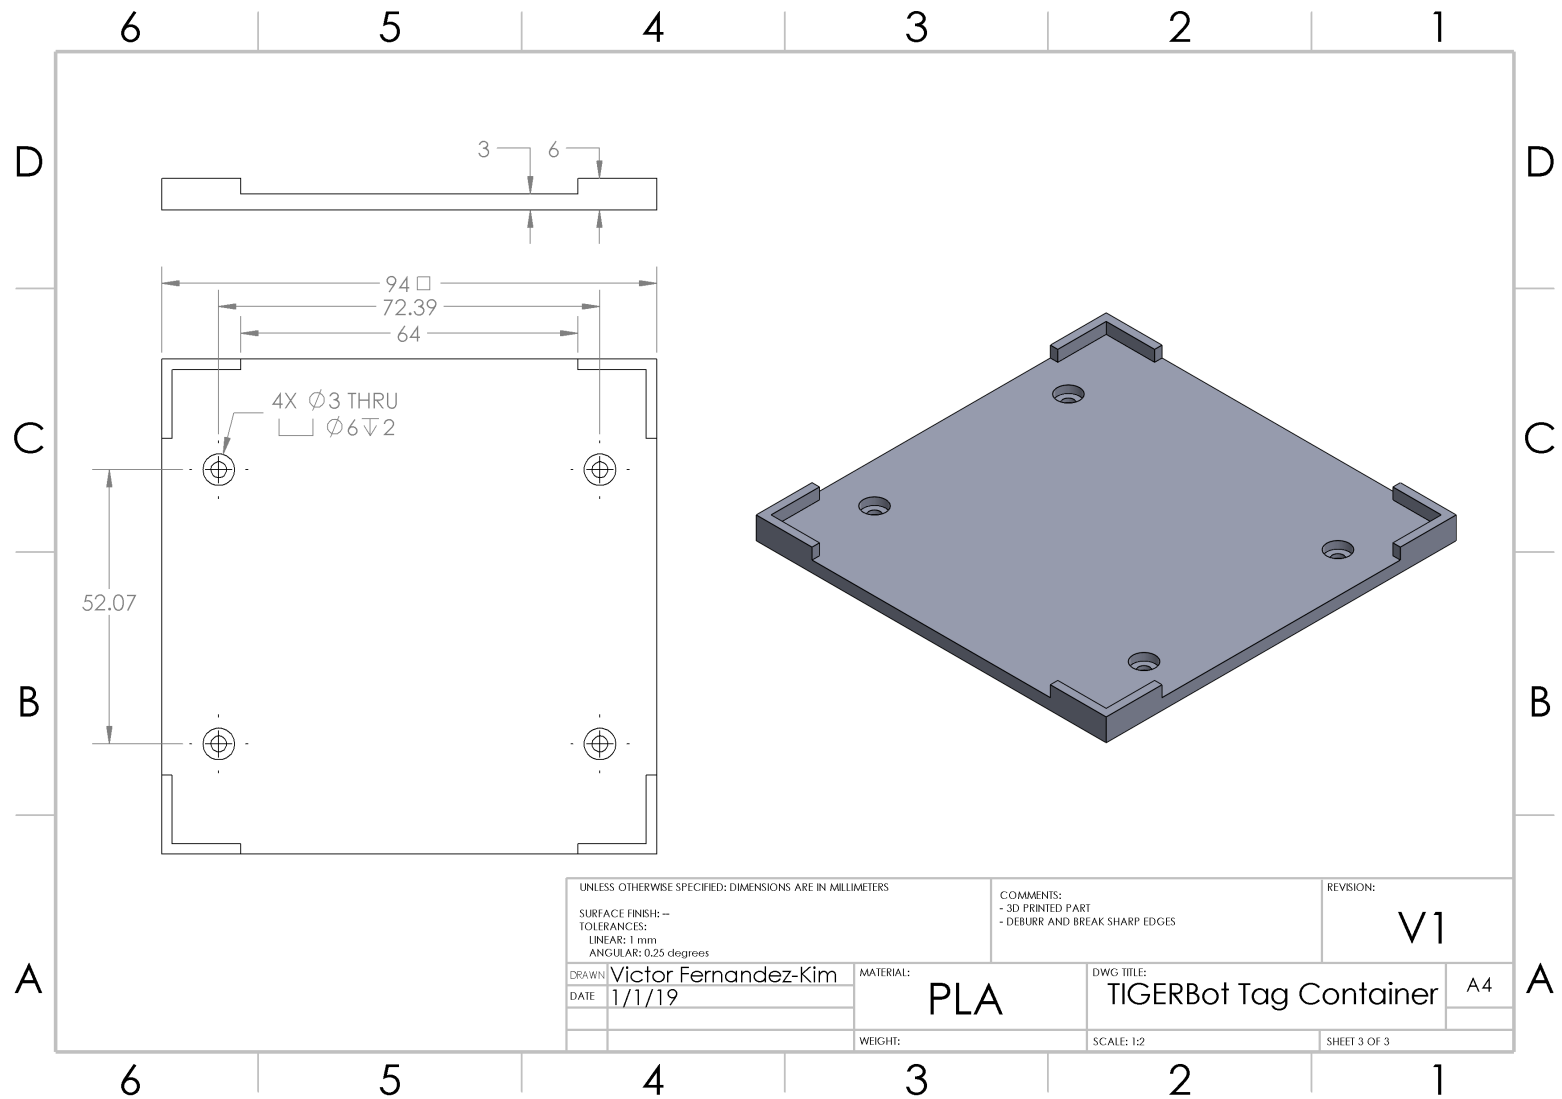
TIGERBot Tag Container Mechanical Drawing.
